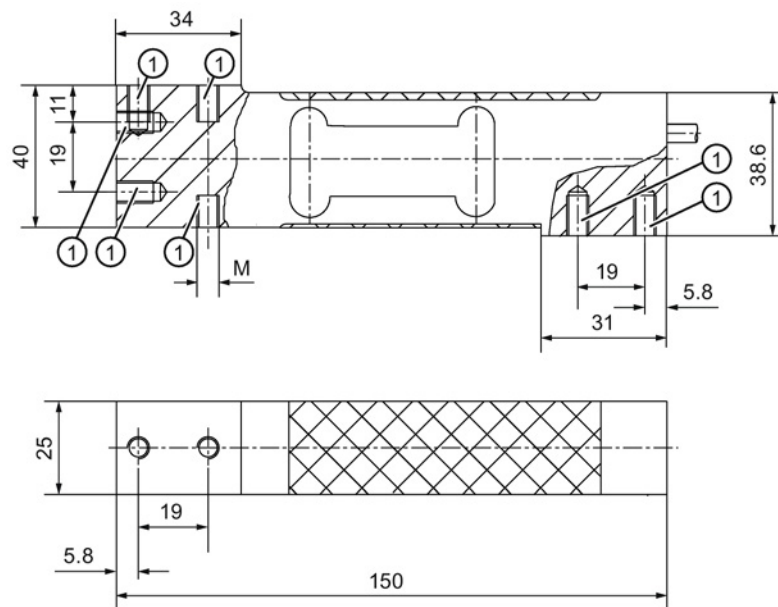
SIWAREX WL260 SP-S AA dimension drawing
